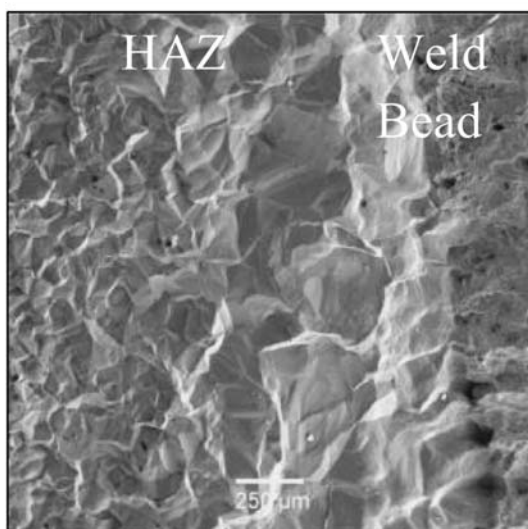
4 mm thick AISI 409 welded at a heat input of 1.0 kJ/mm (Modified Practice Z)
